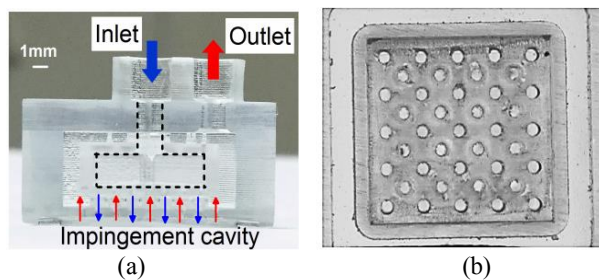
Fabrication of the 3D printed cooler [9]. Detail of the channels in cross-section of the cooler (a); bottom view of the nozzle plate with inlet/outlet nozzles (b).
